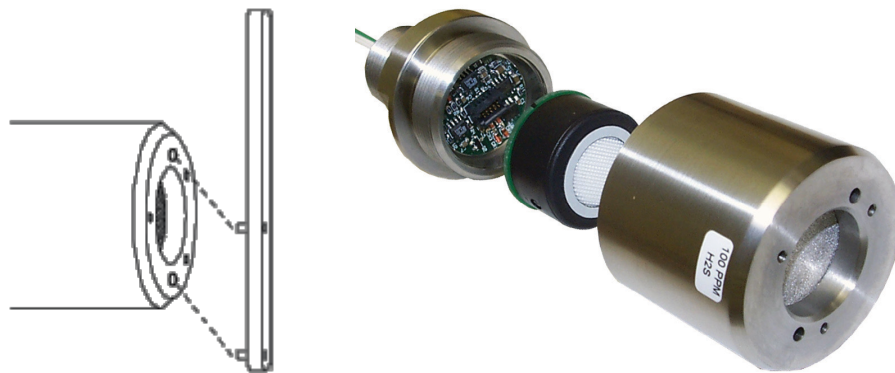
Sensor Head Cap and Sensor Replacement Tool
